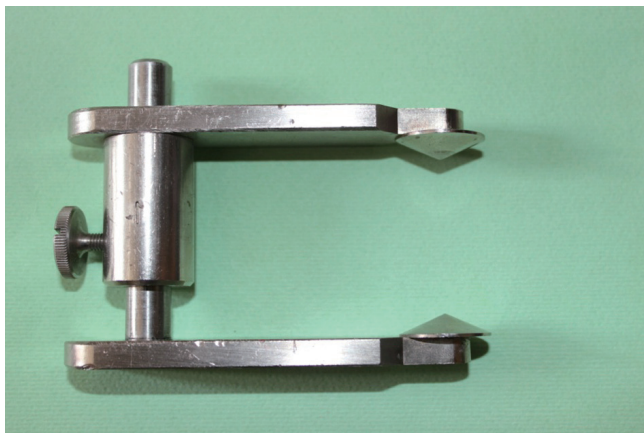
The holding device used for the same positioning of specimens during measurements.
